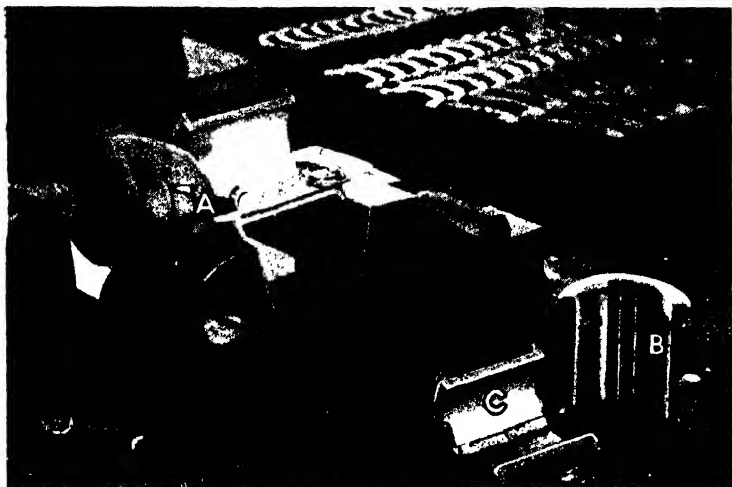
PLATE Vc. CHIPPING TEST ON A FINISHED BEARING
